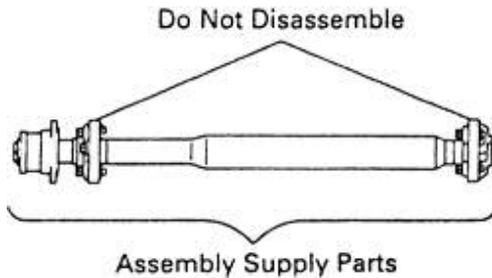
The couplings are on each end of the shaft, DO NOT disassemble them
